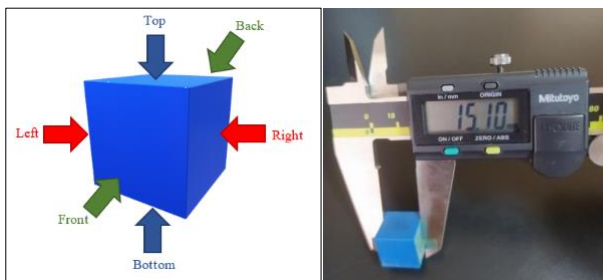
Guide in dimensional measurement of cube specimen and photo of actual measurement
